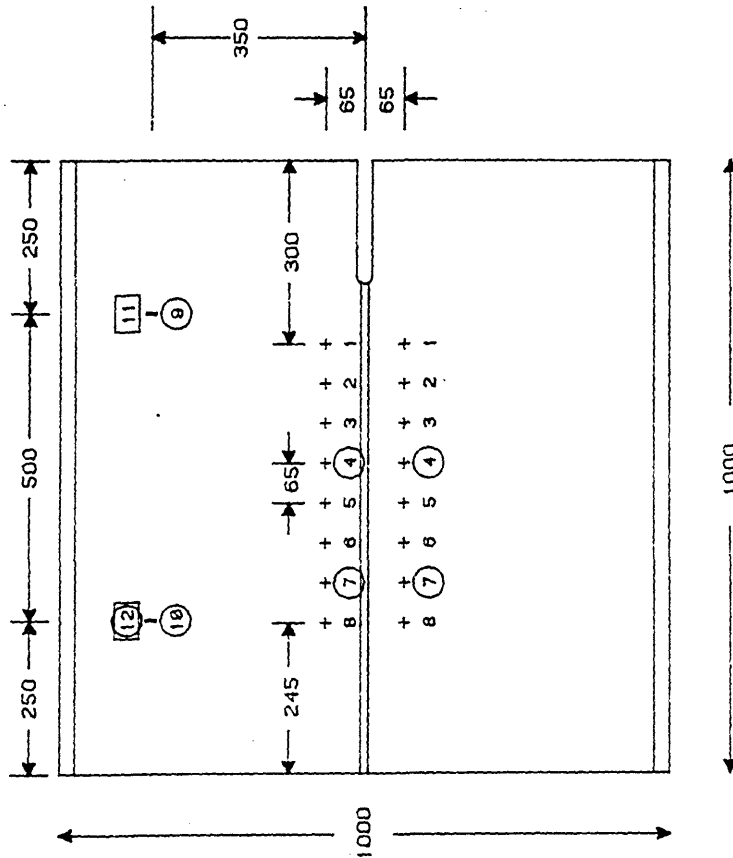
Positions of strain gages on wide plate test specimen. All dimensions are in millimeters.
